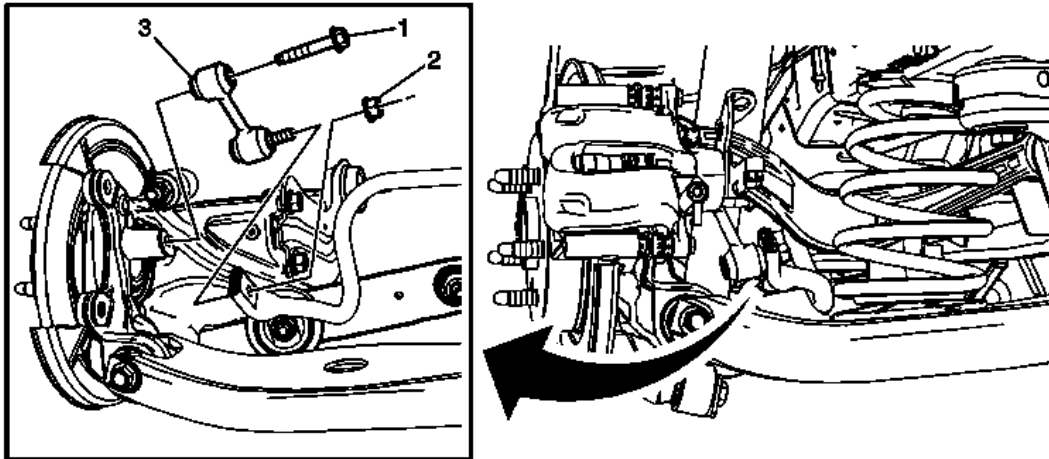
Stabilizer Shaft Link, Nuts & Bolts (GNC)
